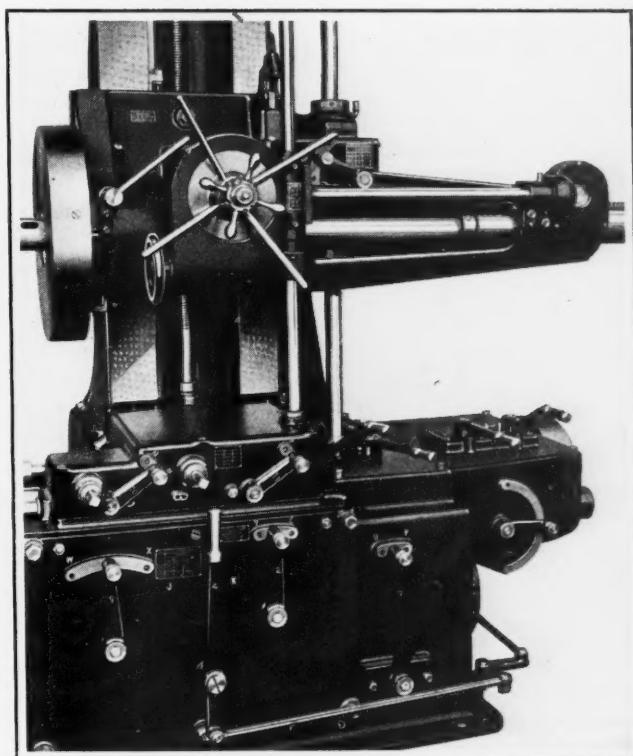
Close-up View showing Centralized Control on the Pawling & Harnischfeger Boring, Drilling, and Milling Machine
